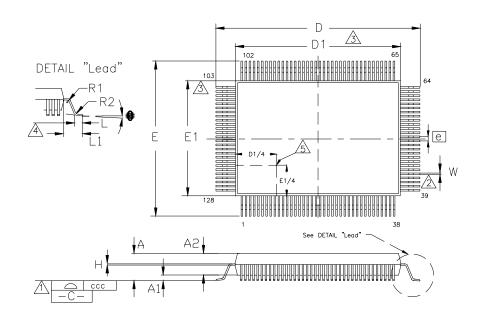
128 Pin QFP Package Outline, 14X20X2.7 Body, 3.2mm Footprint
